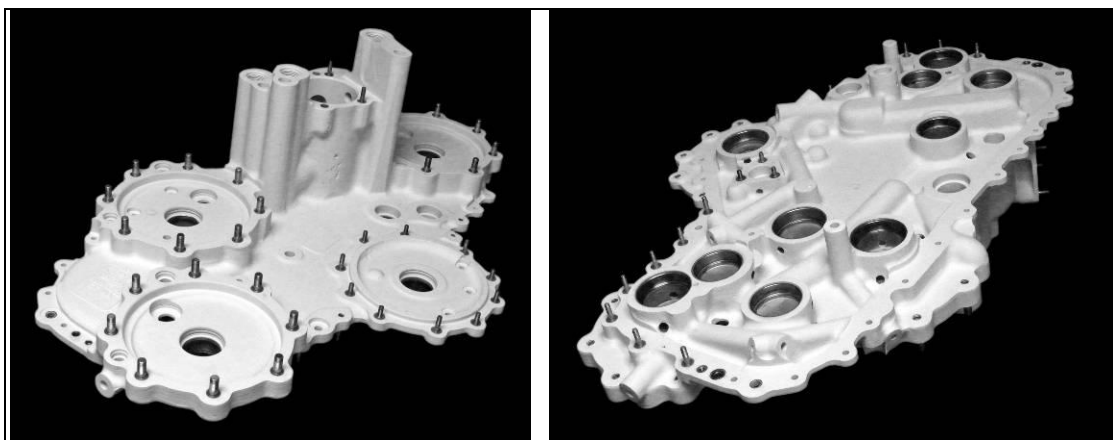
H-47 accessory cover after Tagnite and removal of masking tools.
